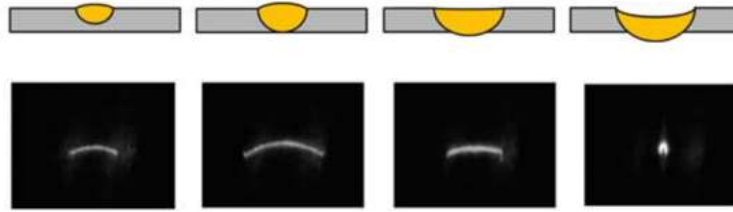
Reflective images of weld pool under different penetration states.
